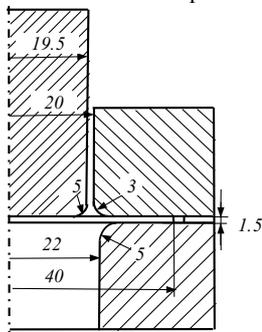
b. Schematic of the die set with the geometrical dimensions (mm).
